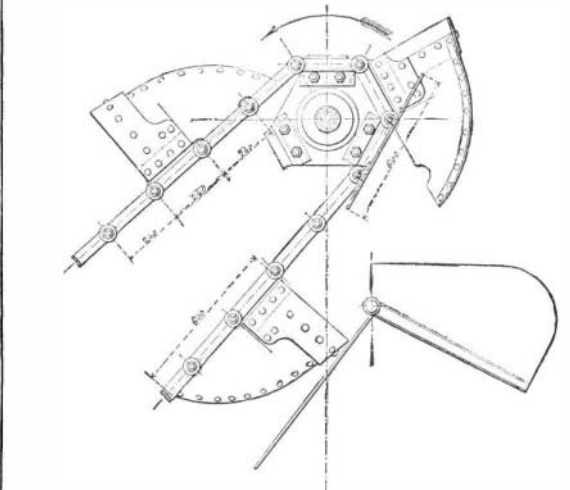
DETAILS OF UPPER TUMBLER AND BUCKET CHAIN.
